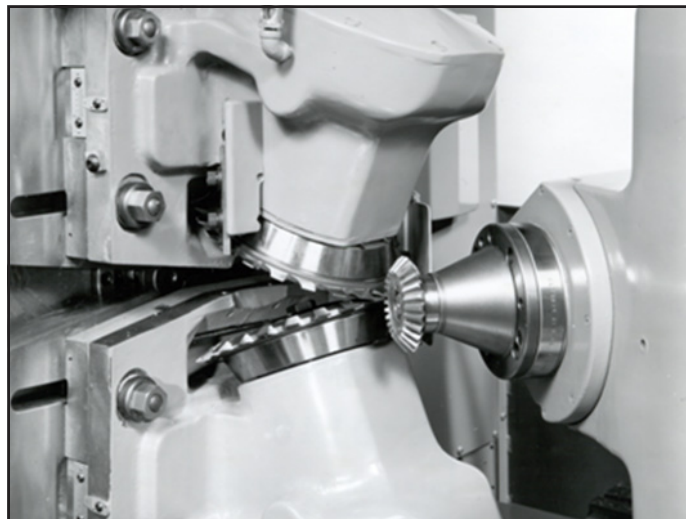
Coniflex cutting with an interlocking HSS dual cutter arrangement.
